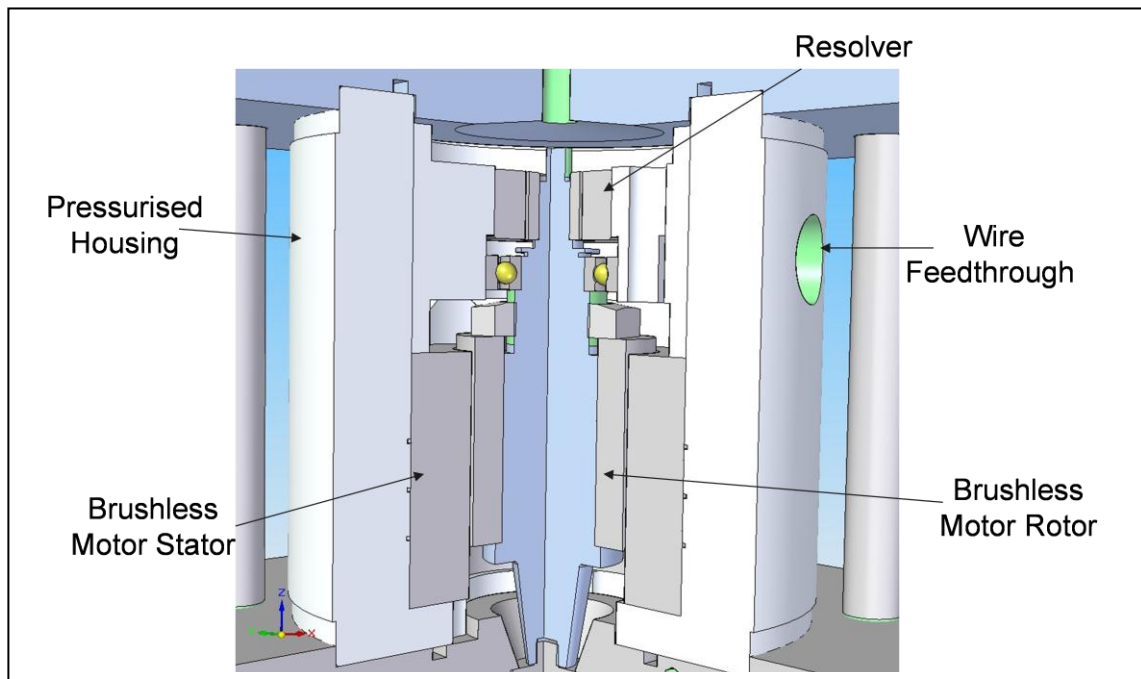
Enclosed Resonant EHA electric motor cutaway
